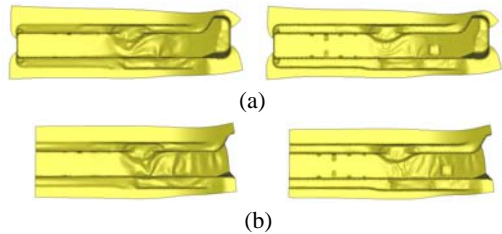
Deformed shape of the blank with the initial tool design : (a) CASE2; (b) CASE3.
